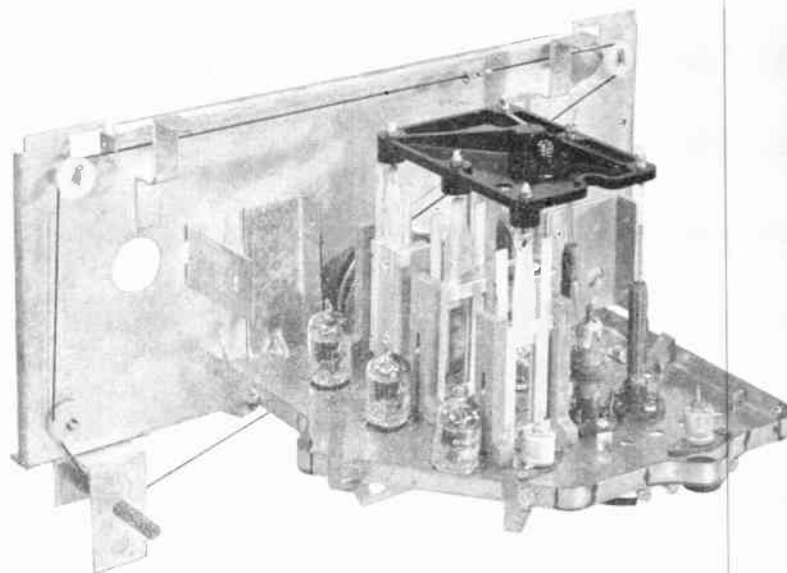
Tuning assembly utilizing General Electric "guillotine" tuner. Adjusting screws for r-f, mixer, and oscillator tuned circuits alignment can be seen on top of assembly
